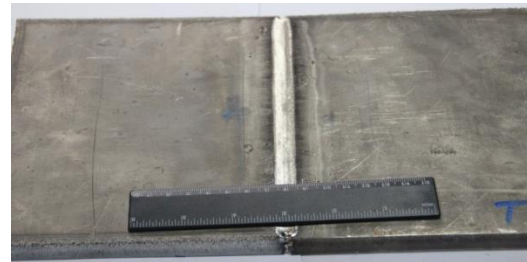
Reverse side of the weld joint of titanium alloy.
